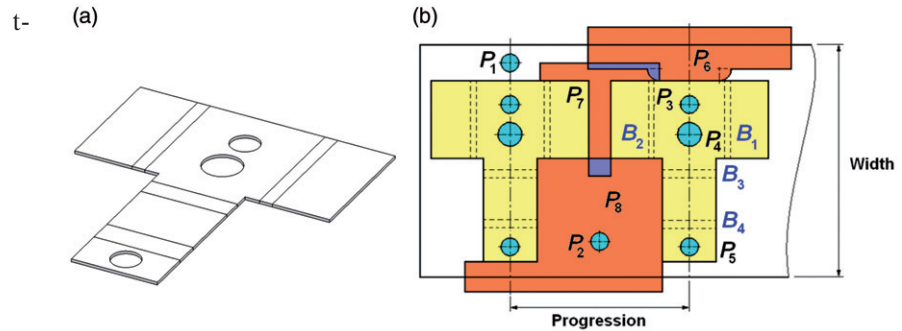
(a) Unfolded sheet metal, (b) Punch designs.
